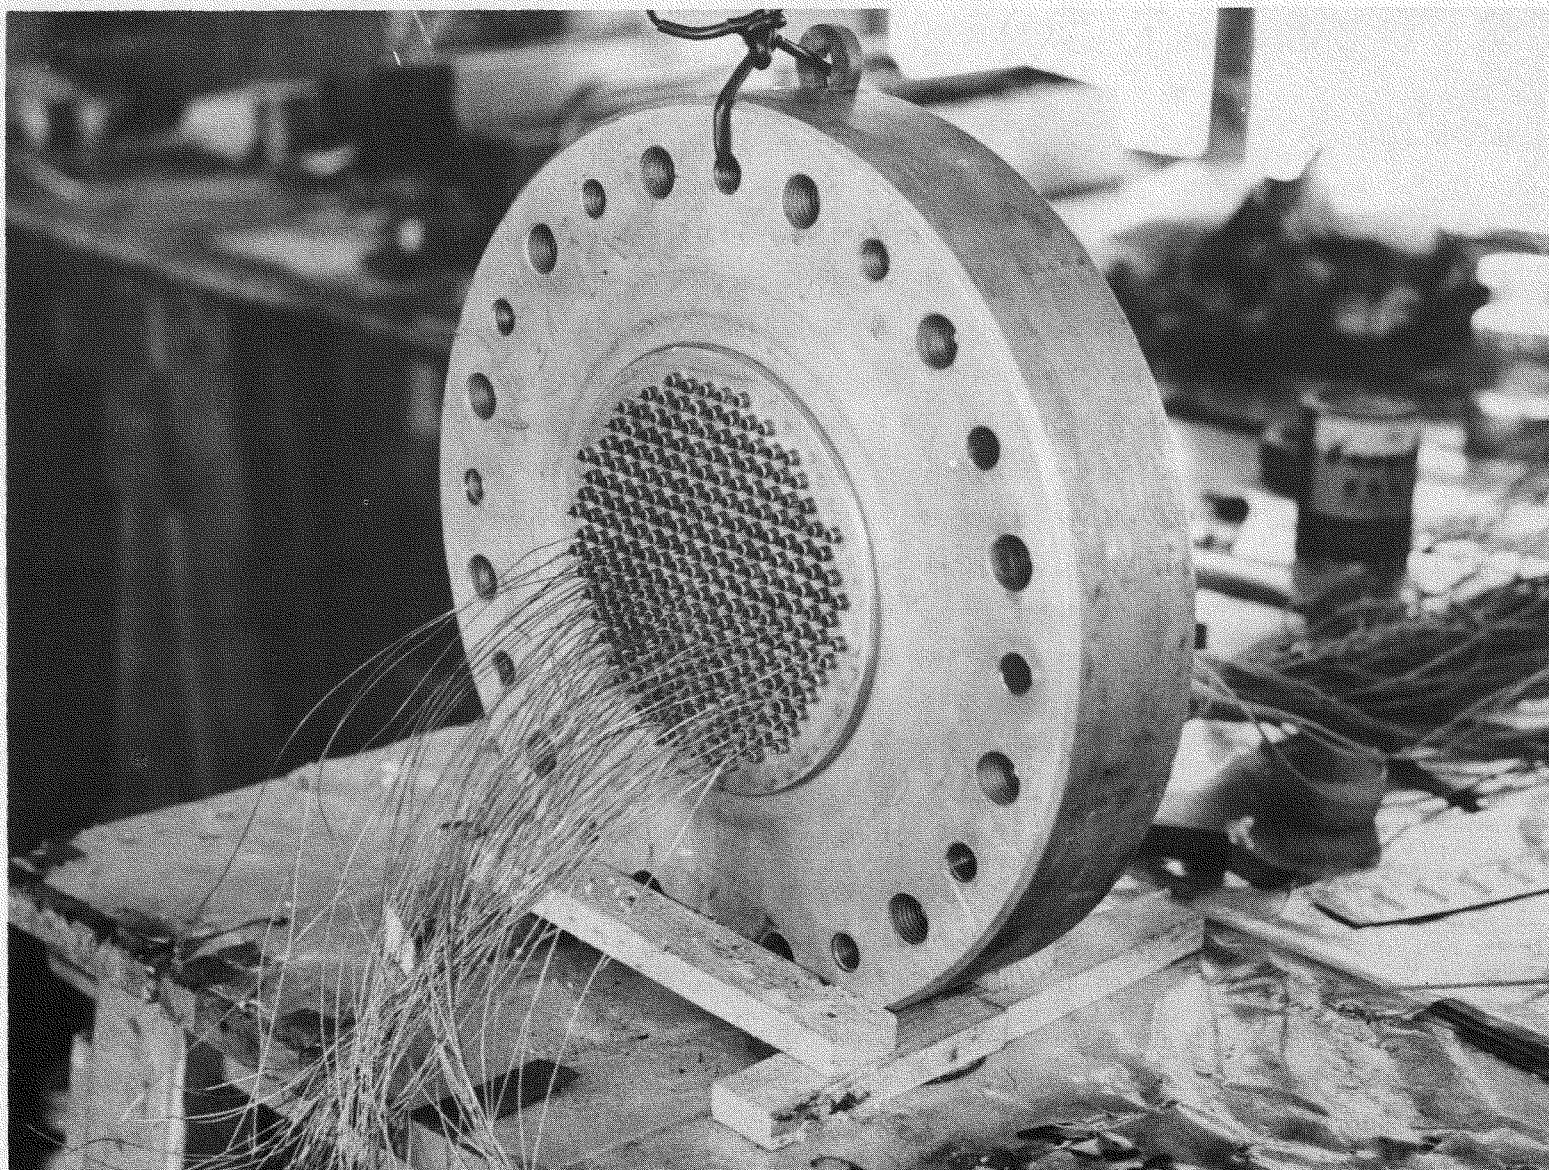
B. FERRANTI THERMOCOUPLE PENETRATION PLATE 240 METAL-CERAMIC SEALS
